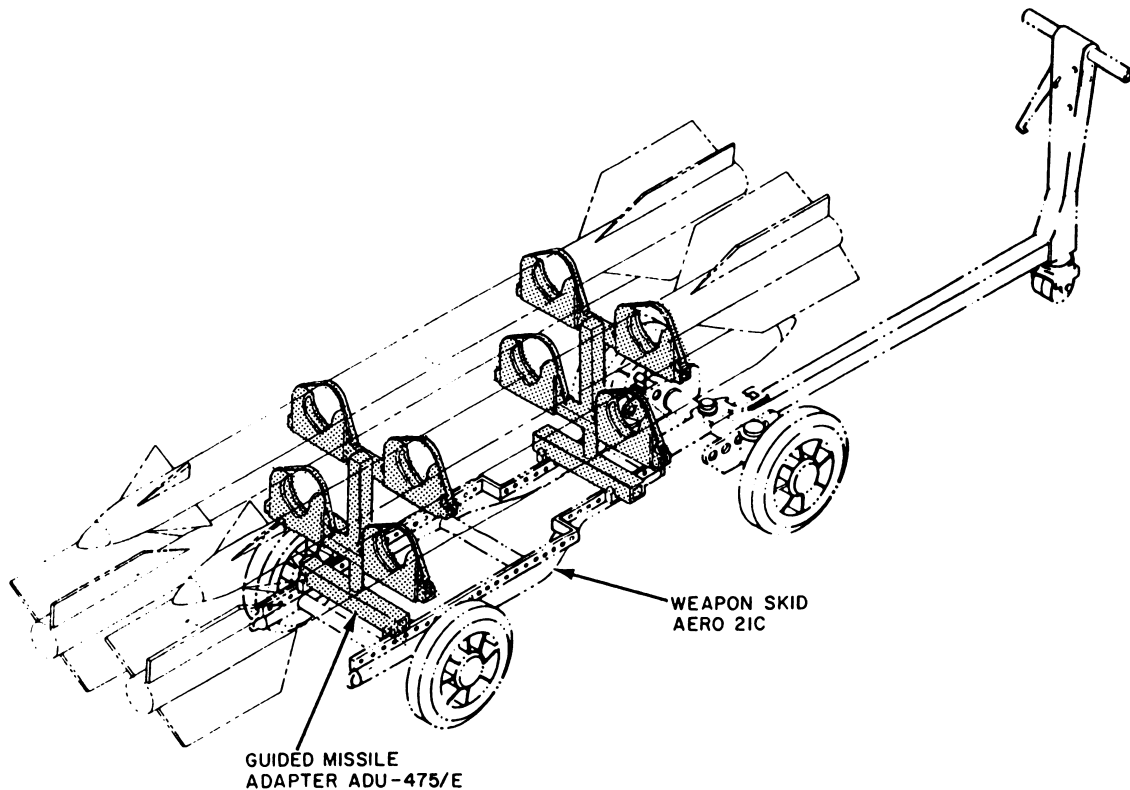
ADU-475/E guided missile adapter mounted on an Aero 21C weapon skid.
